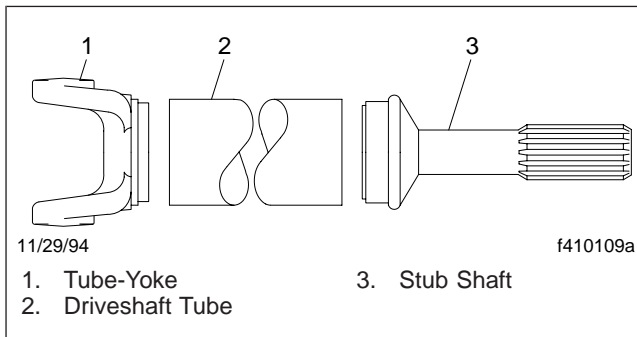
, Driveshaft Tube, Stub Shaft, and Tube-Yoke
